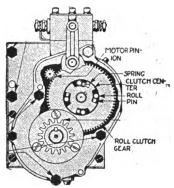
Drive Parts for Double-Deck Motor and Dynamo (Gray & Davis).
